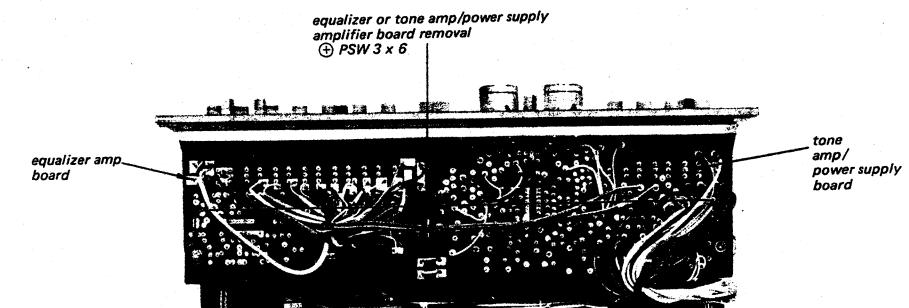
Equalizer and tone amplifier/power supply board removal
